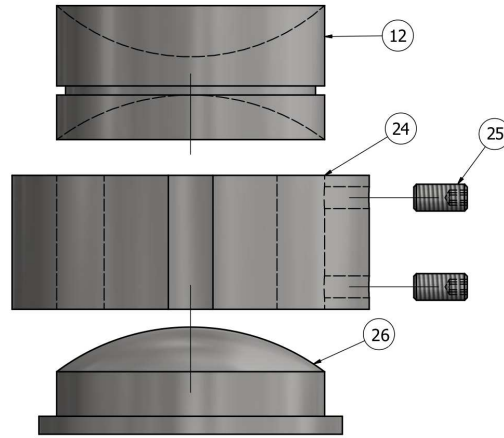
Exploded view of the mold concave adapter. For the compression and the head support, a PMMA concave cup can be made by filling in this mold. The bill of materials is available in the Table 3.2.
